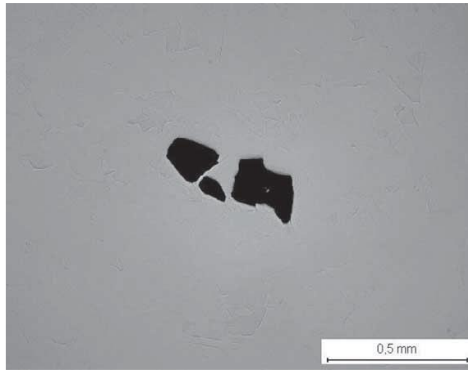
Pores in the overlap zone of a 50 mm thick copper FSW weld. [9]
